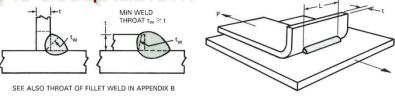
Fillet Welds (See 2.2.4.1)
